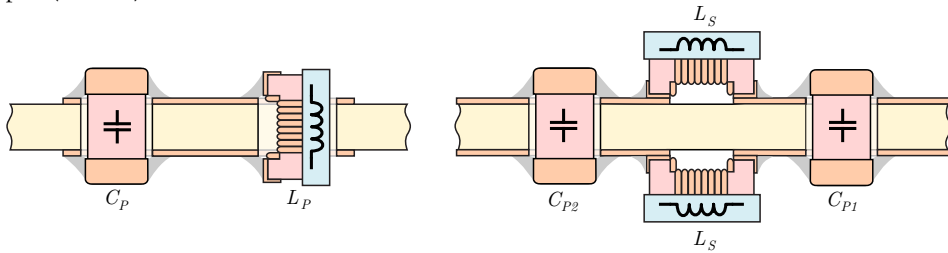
Cross section of PCB with the through hole mounted SMD components
